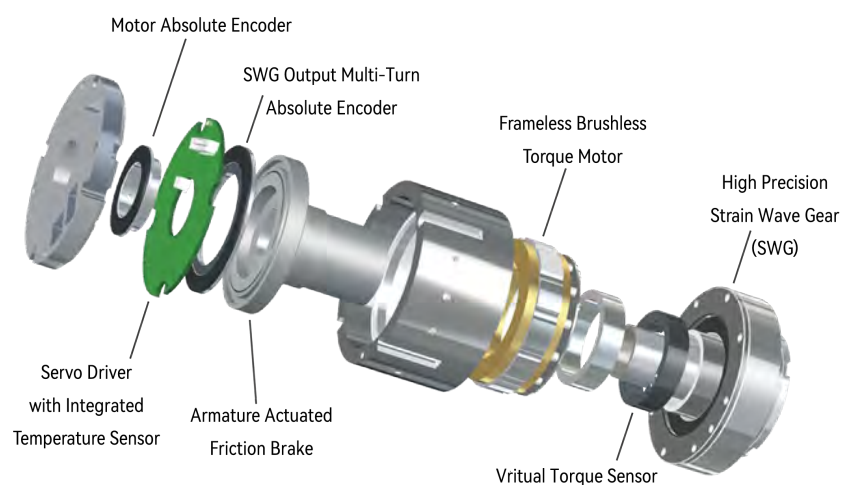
Exploded View of An I-Type eRob Rotary Actuator Module
